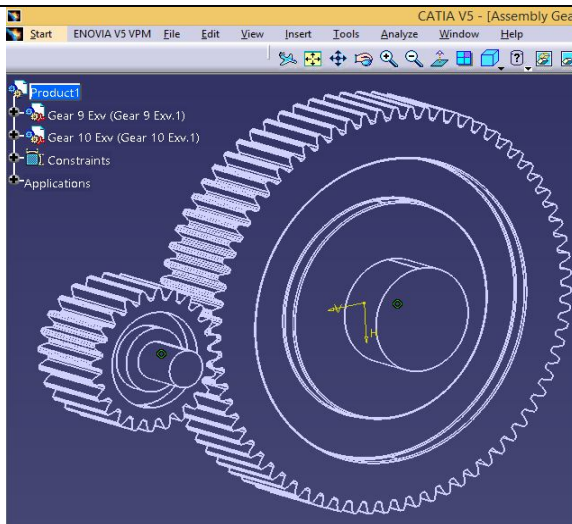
Solid Modeling of assembly of parts with use of CATIA
